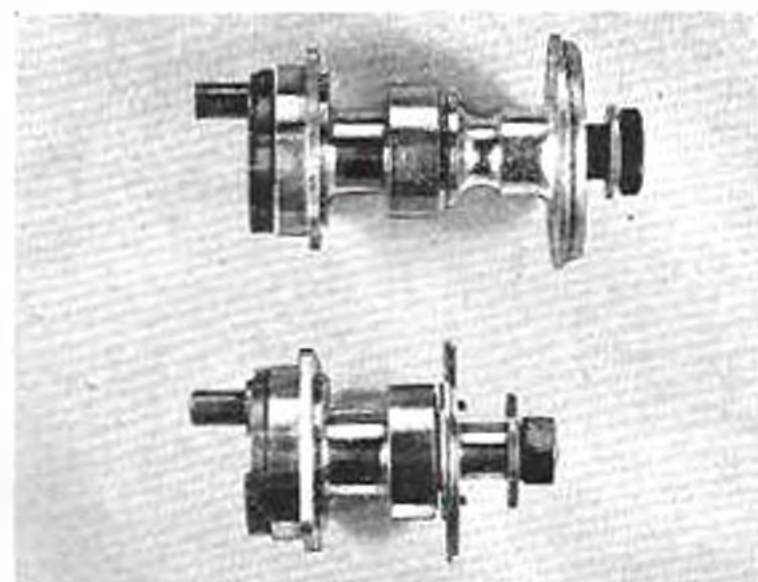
Frontplate assembly using standard prop. driver (top). Assembly using turned spinner backplate as described in previous instalment (bottom).
